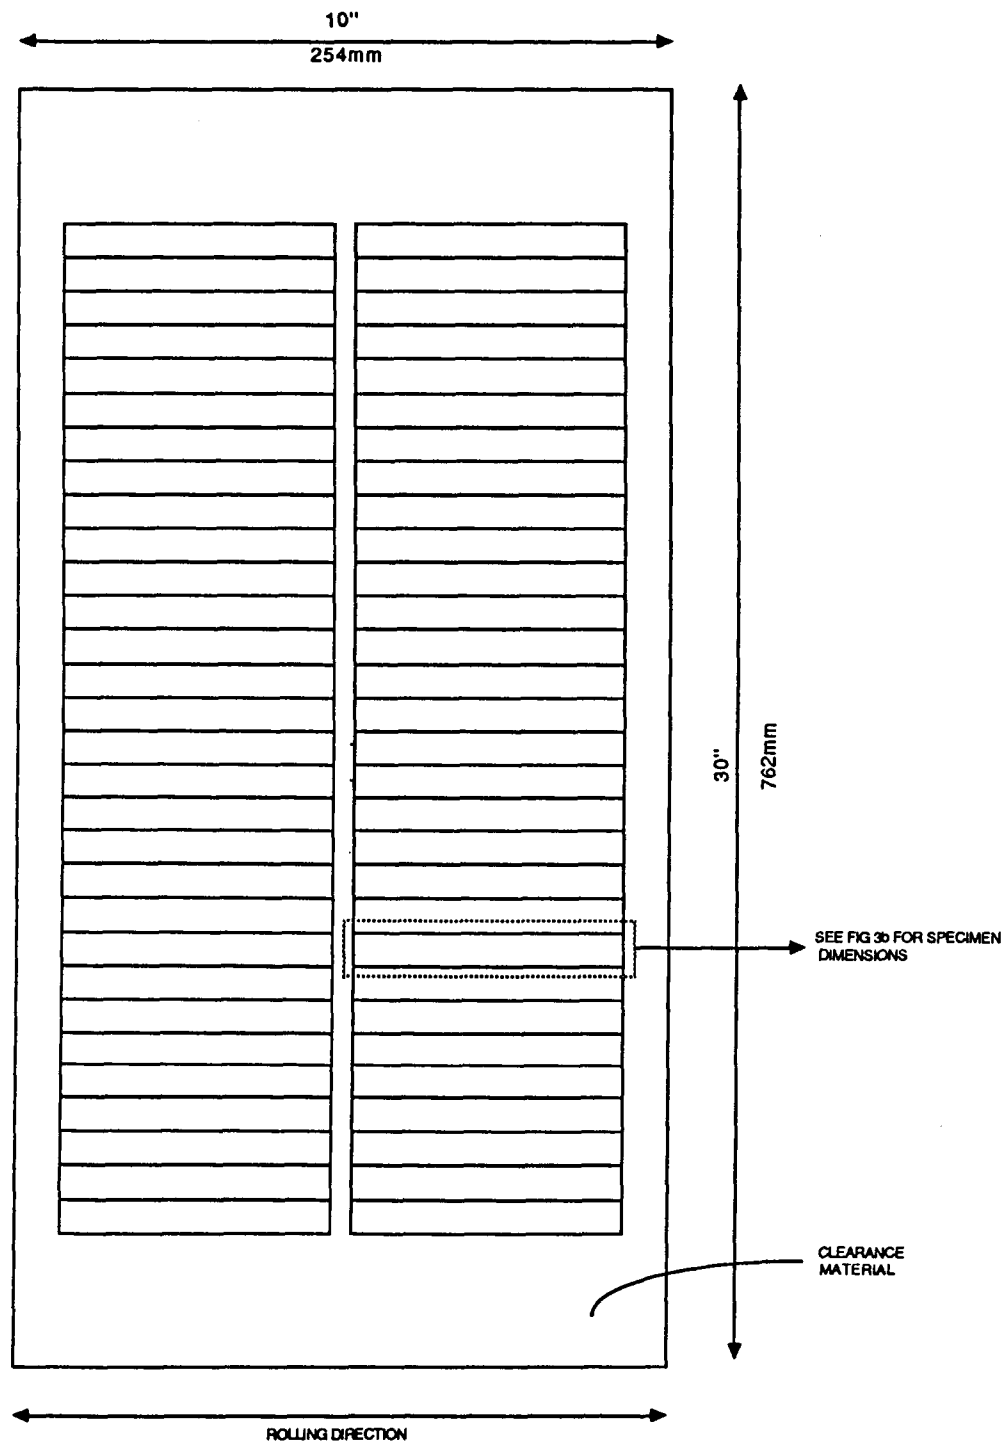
Sketch to show material requirements for two-hole flat tensile specimen. 0.25" plate * 10" * 30"
